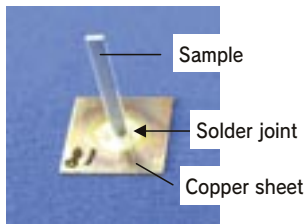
Appearance of a sample for pull-strength test of solder joint
